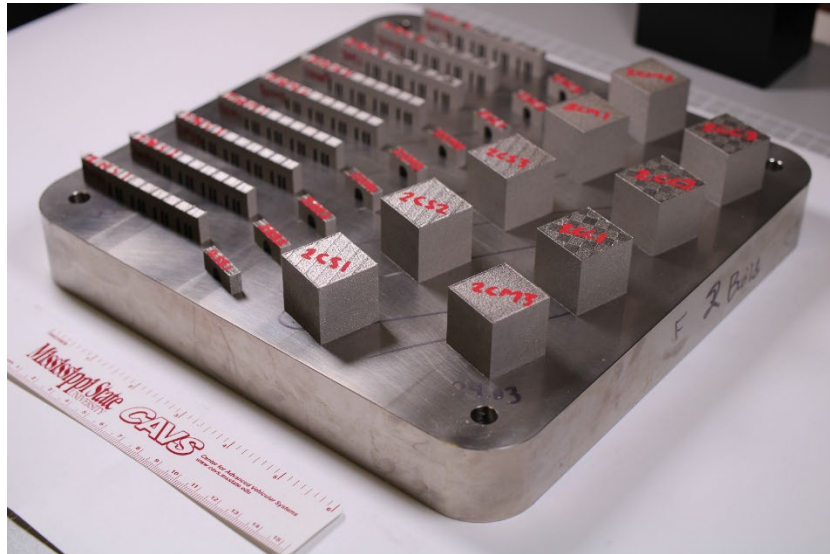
Substrate containing as built NIST bridges, single arched bridges, and contour cubes
